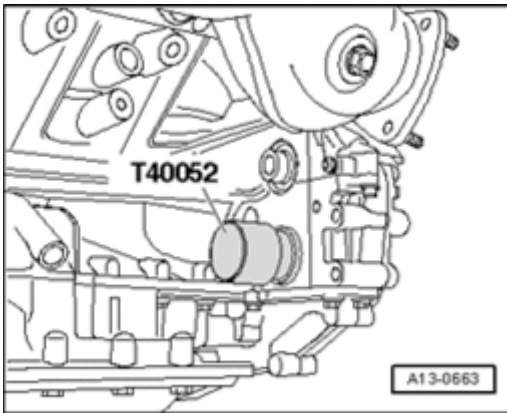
Driving In Sealing Ring For Power-Steering Pump Drive Using Thrust Piece T40052
